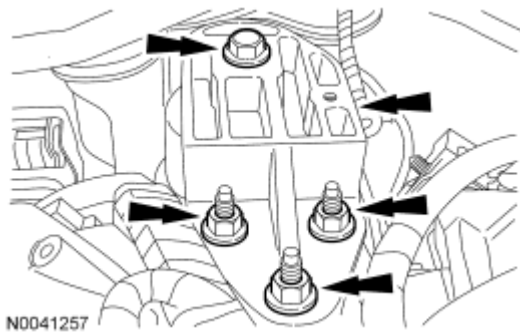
Locating Engine Mount Bracket, Bolt And Nuts
